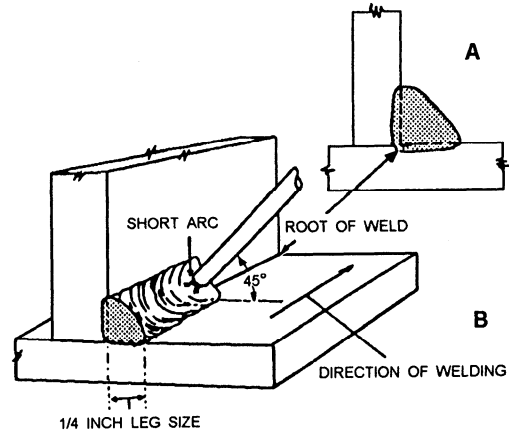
Position of electrode and fusion area of fillet weld on a tee joint.
